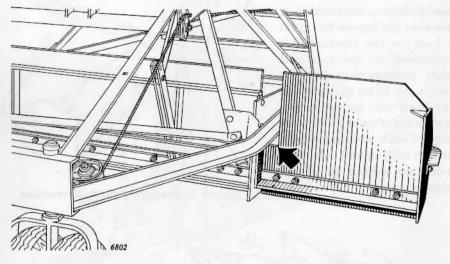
Point of Adjustment between Blade Extension and Lower Frame Angle
